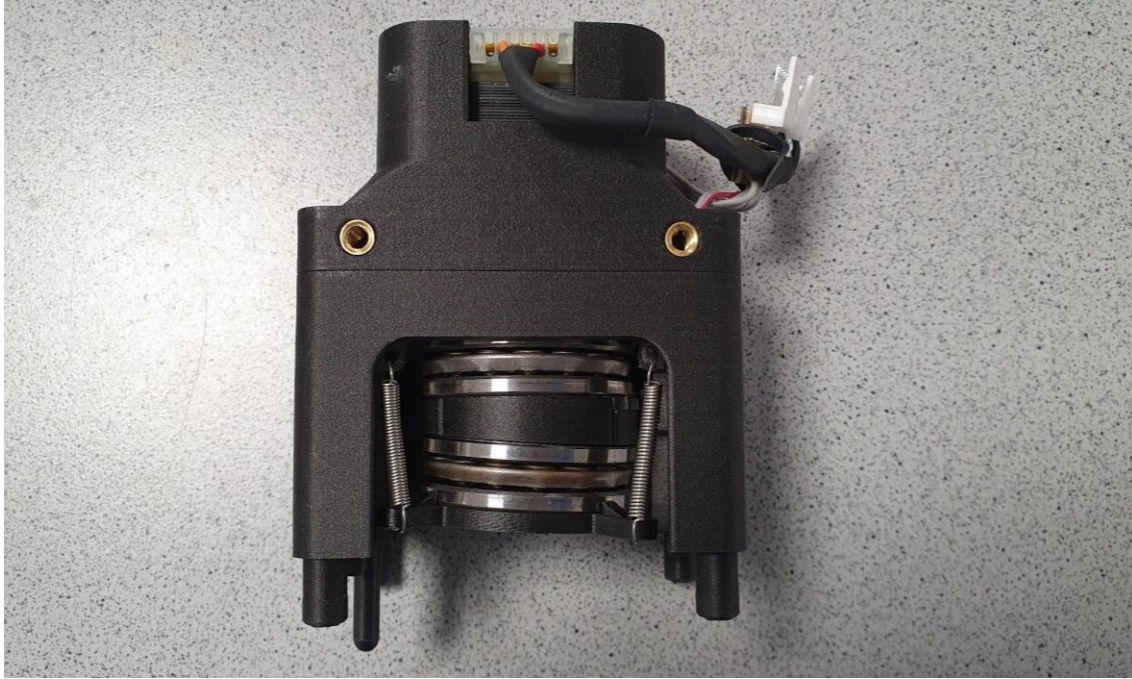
Motor plate with swash plate assembly mounted inside.
